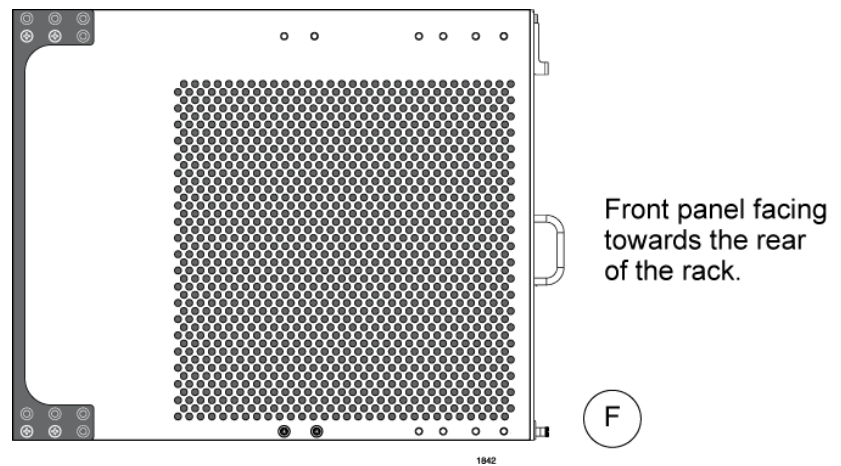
Rack Bracket Locations for Reverse Position of Chassis
